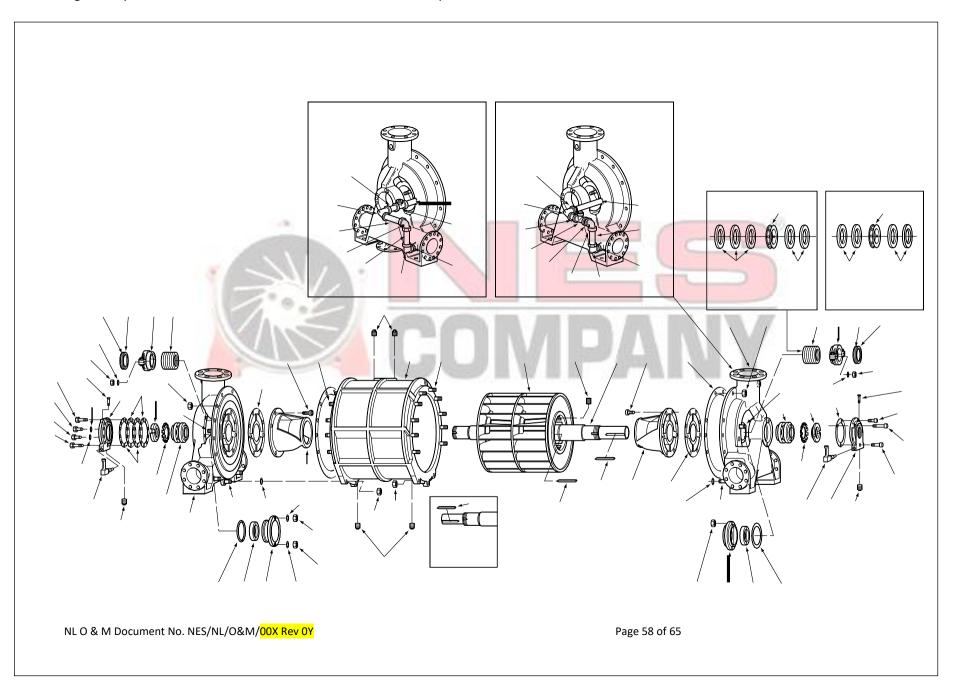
Exploded View of NES NL 2000 Vacuum Pumps.
